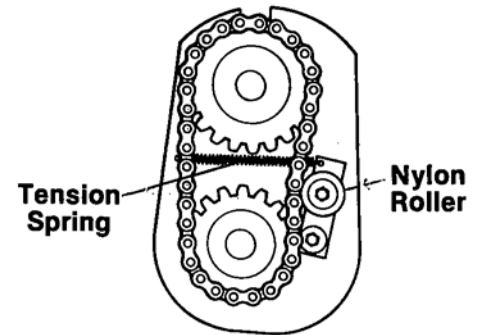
" x 62' - 65' and All 10" & 12" Century
